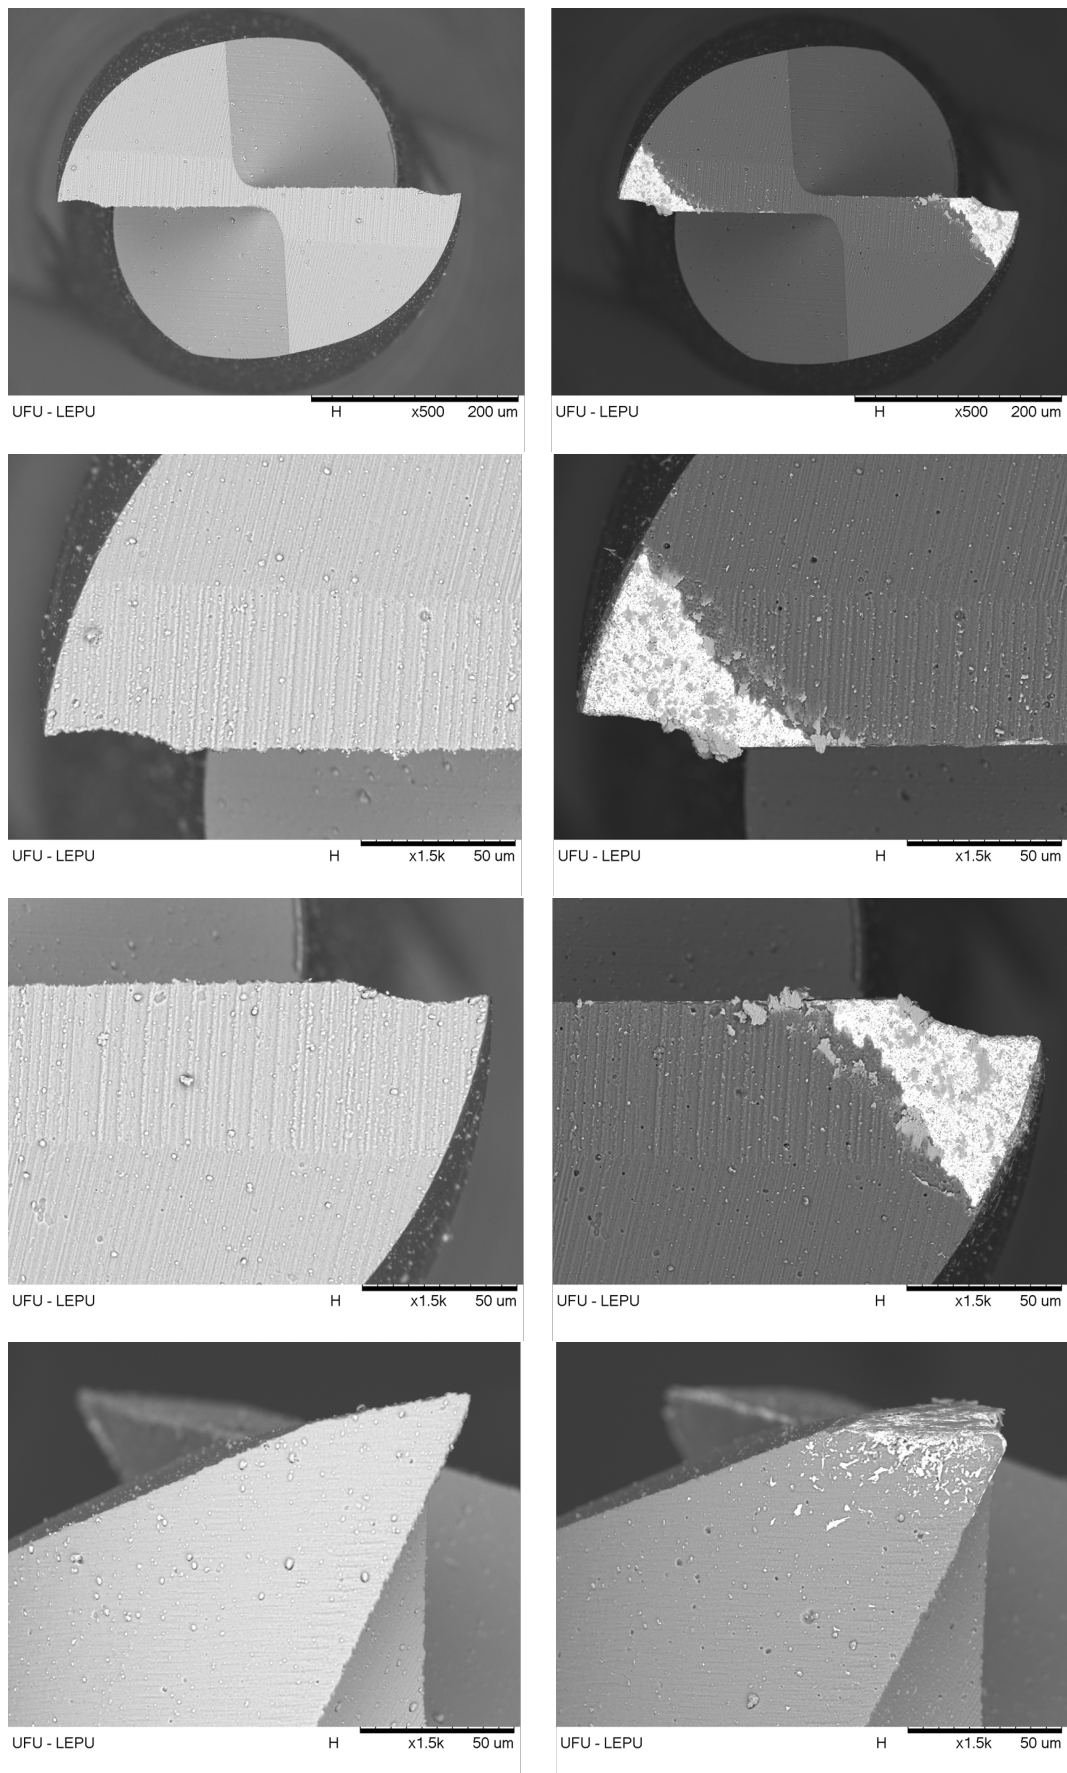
Condition of the micromill before (left) and after (right) a machined length of 150 mm on sample 1.
